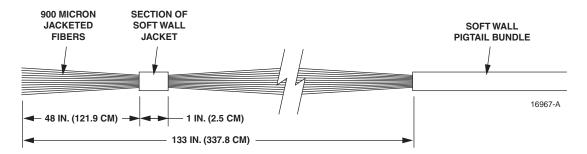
12-Position Termination and Splice Tray Breakout Dimensions
